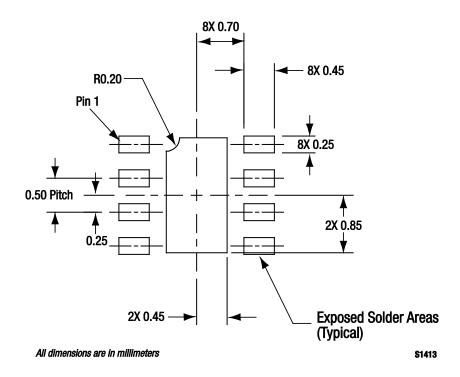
SKY67100-396LF PCB Layout Footprint (Top View)
